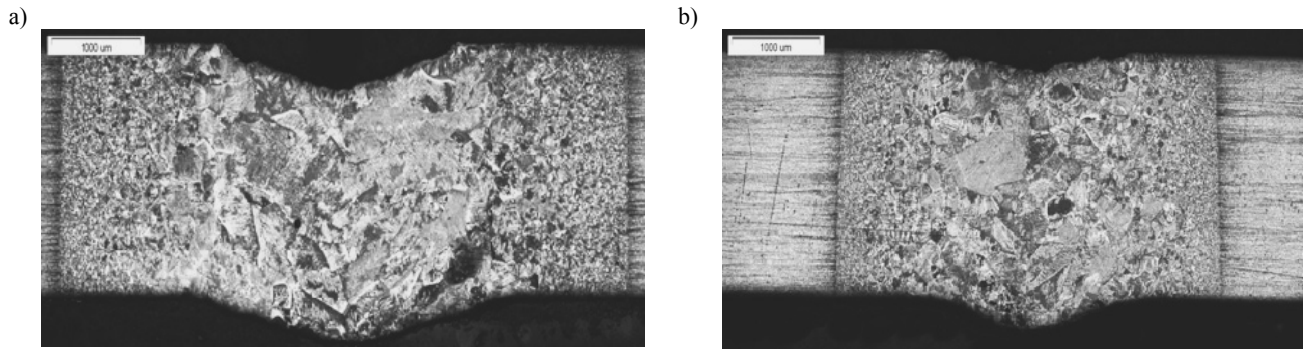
Macrograph of the cross section of butt joint of titanium alloy Ti6Al4V sheets 2.0 mm thick laser welded with the TRUMPF TruDISK 3302, (Table 6); a) W3 joint, b) W6 joint
